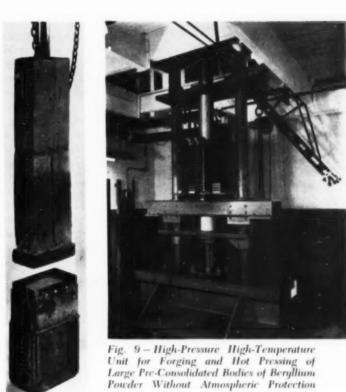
Die and Plunger Used in Vacuum Hot Pressing
